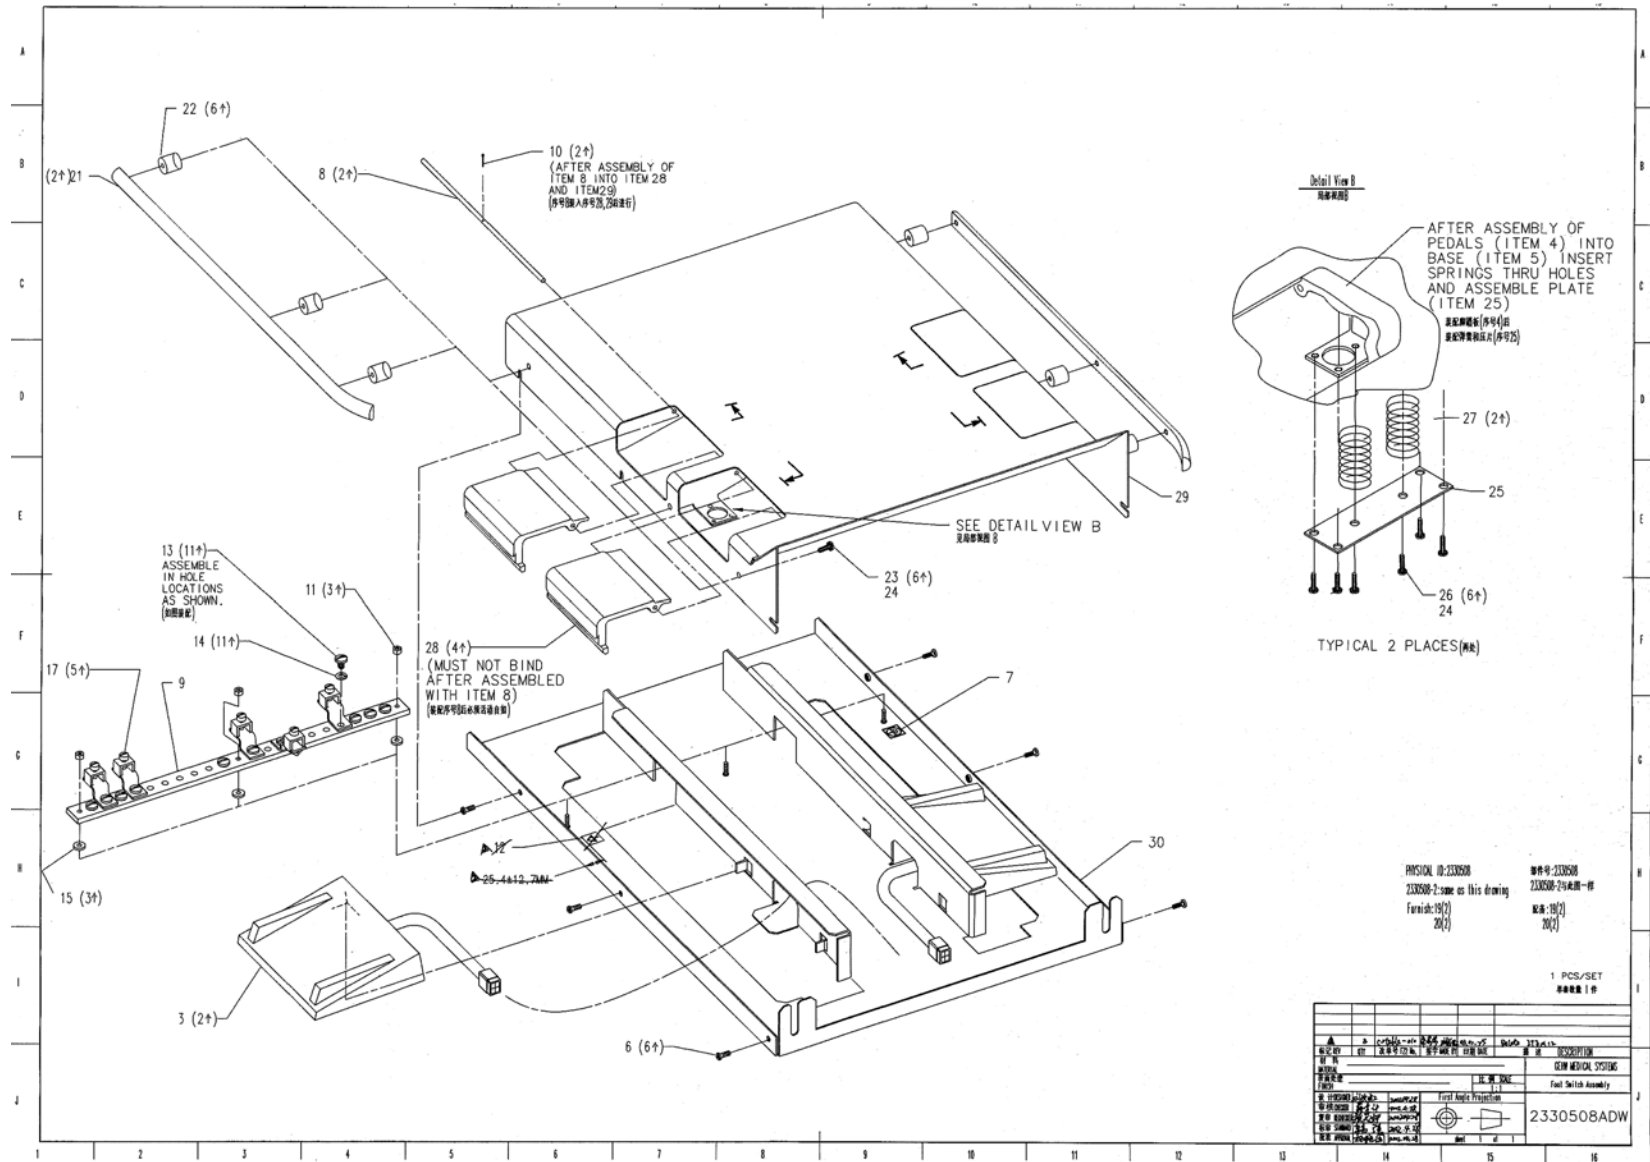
Foot Switch Assembly (2330508, sheet 1, rev 2)
